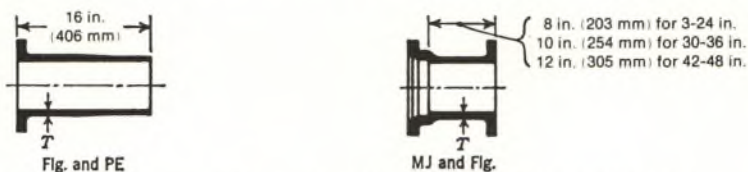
Connecting Pieces, One-End Flanged (See Table 10.13)
